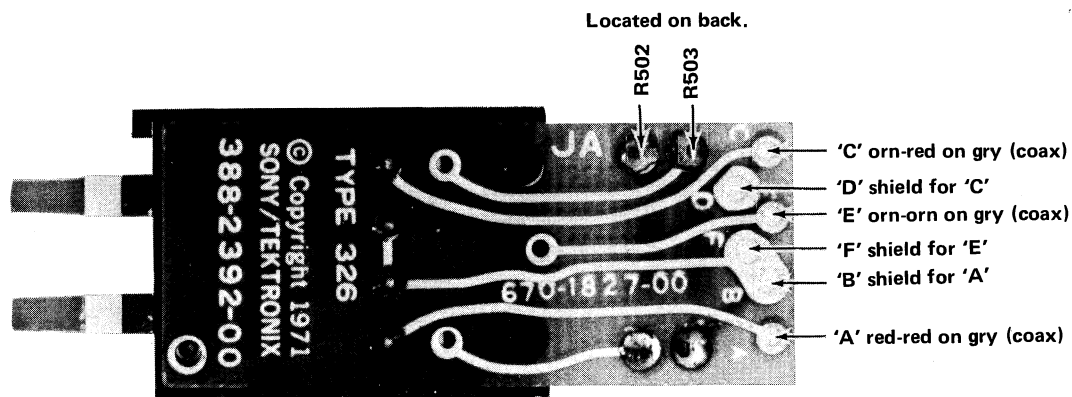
A6 Trigger Source board component location and wiring color codes.
